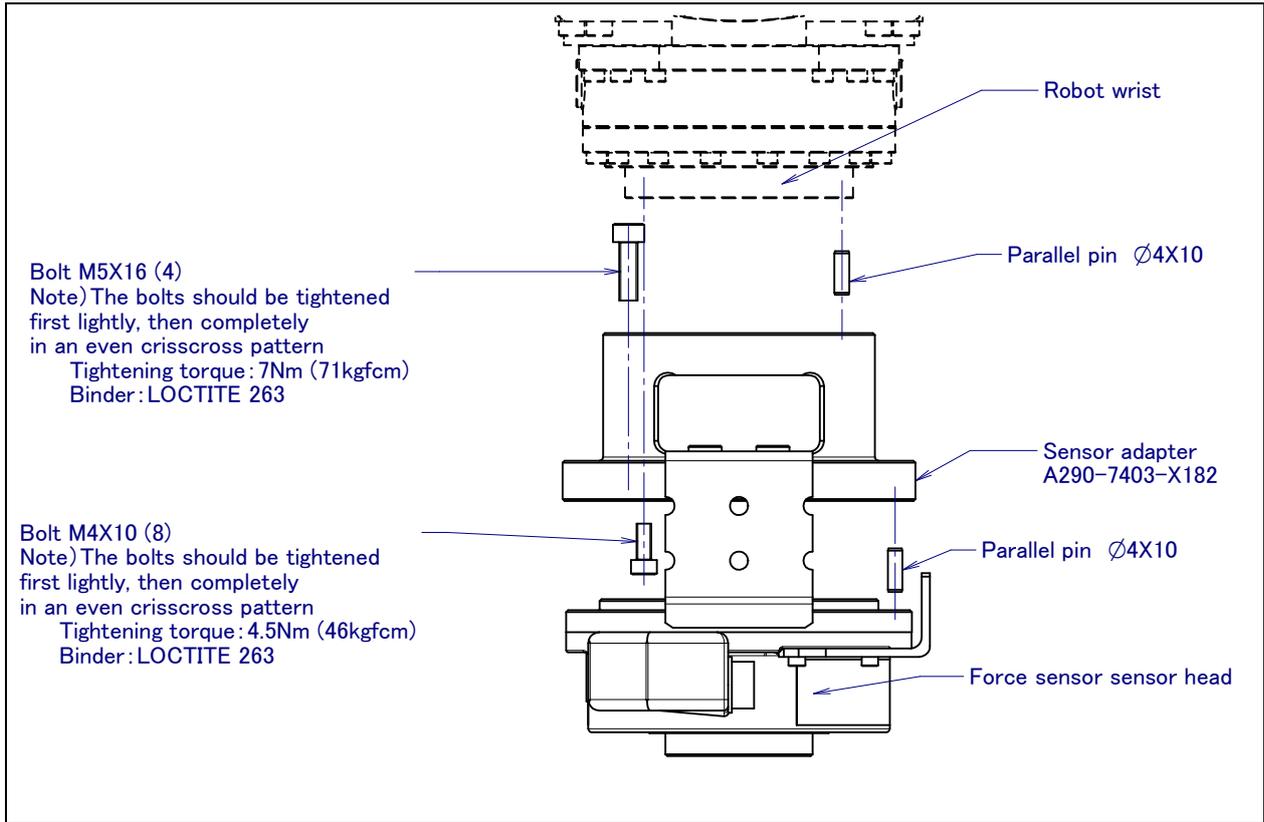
(b) Replacing the force sensor, sensor head and adapter (M-10iA+FS-15iA)
